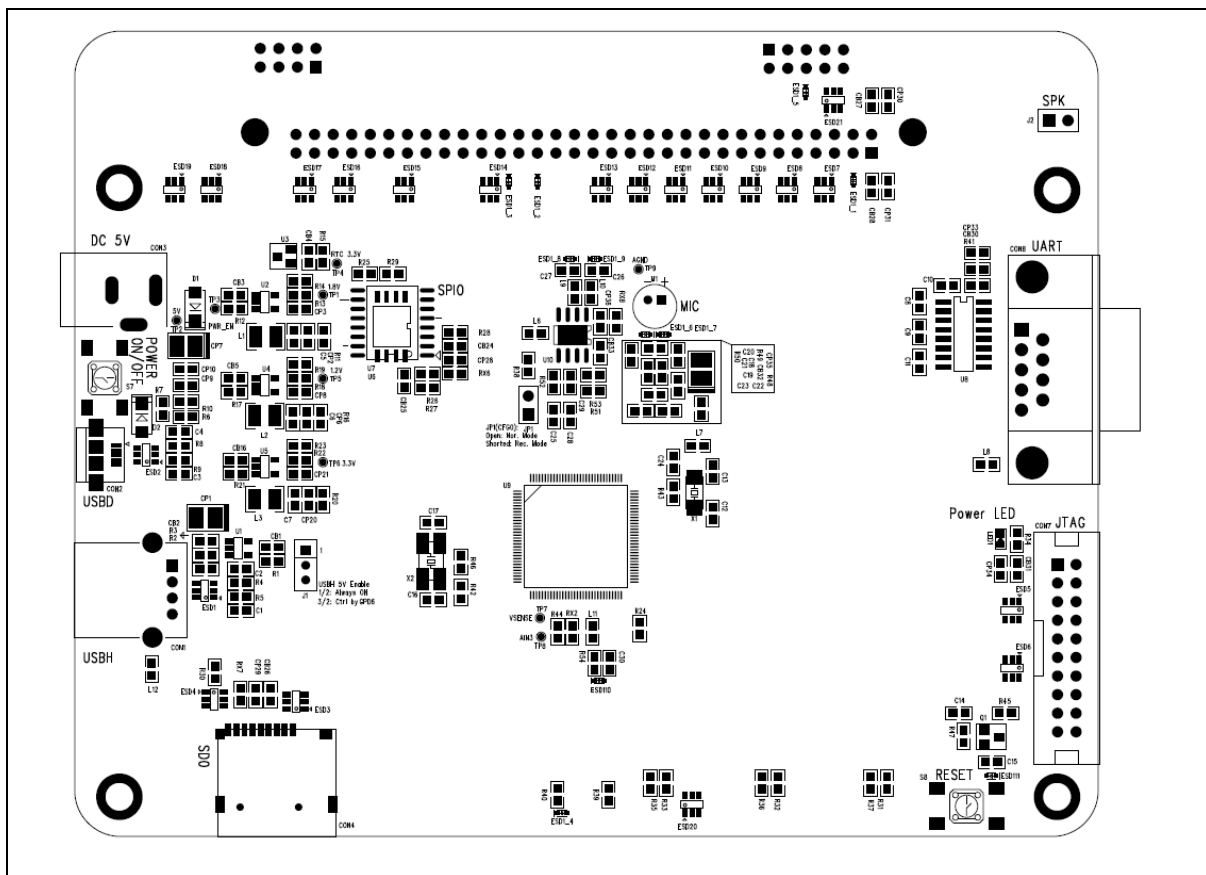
NuMaker-N9H26 PCB Placement (Rear View)
